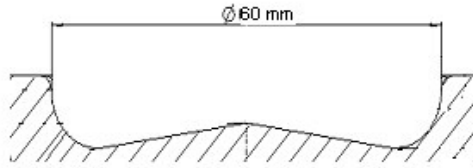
Piston bowl geometry C, with a piston bowl diameter of 60 mm
